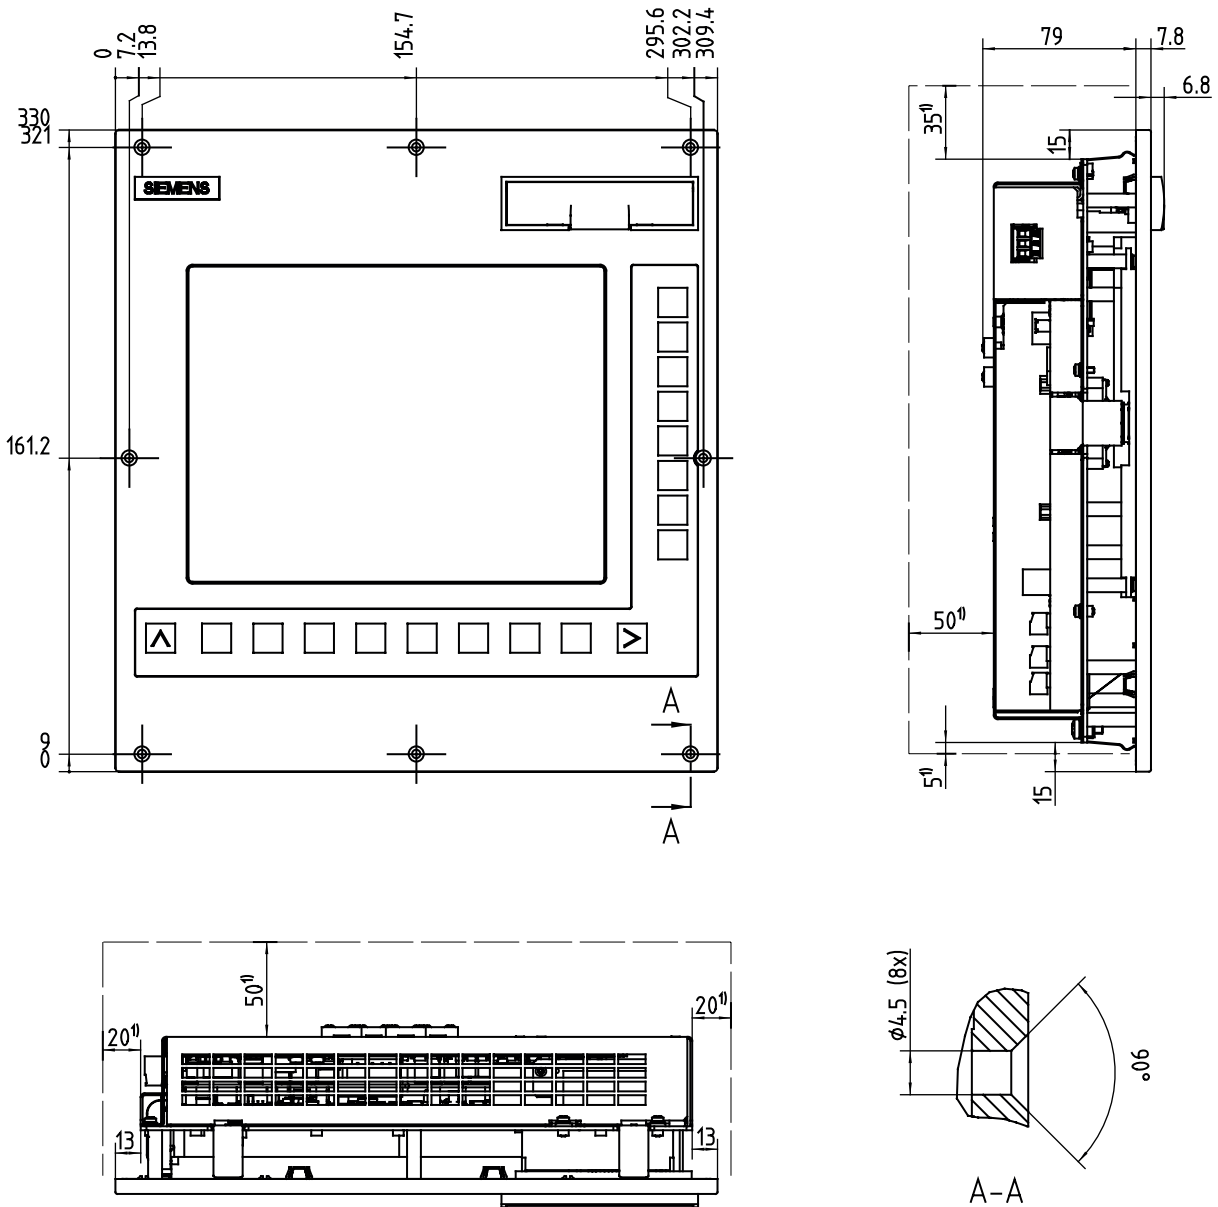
CNC operator panel (PCU) dimensional drawing
